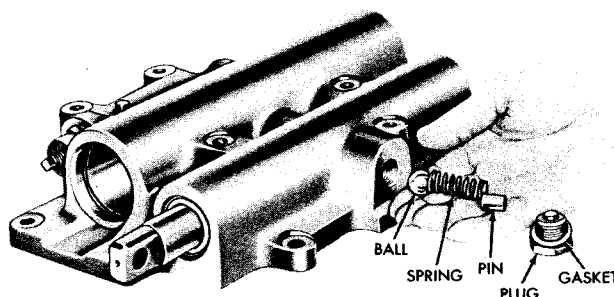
Removing or installing plug, pin, annular gasket, spring, and ball from selector valve body assembly
